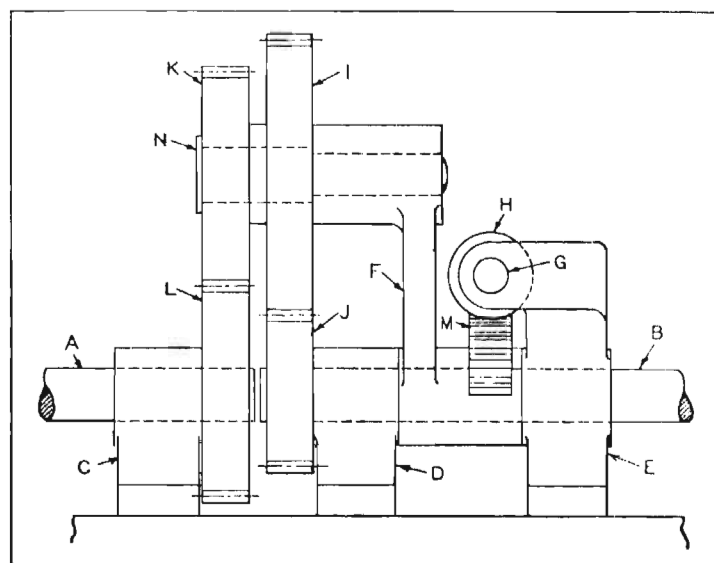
Mechanism for Varying Relative Rotative Positions of Driving and Driven Shafts
